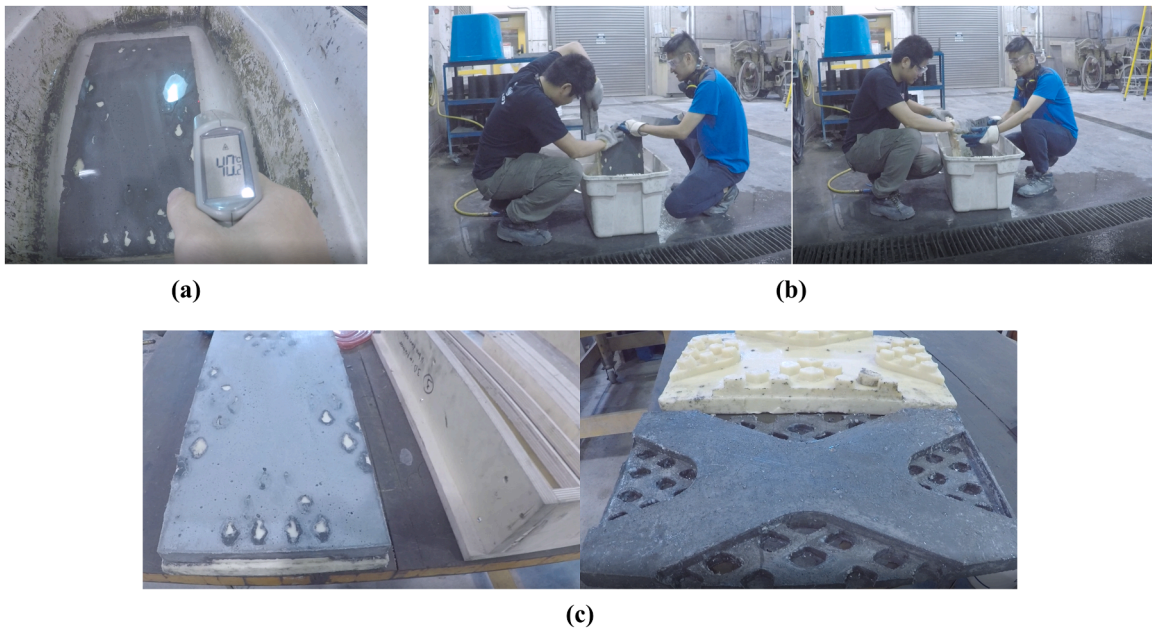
Recycling the wax mold involves: (a) Soaking the prototype in warm water for 15 minutes, (b) Separating the mold and the prototype, (c) Procedures before and after demolding.
